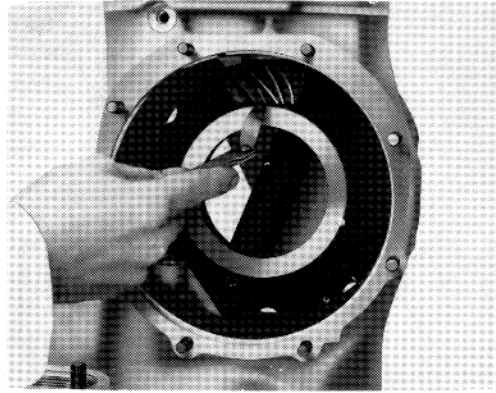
With pinion in the setting gauge, a feeler gauge is used to measure clearance
